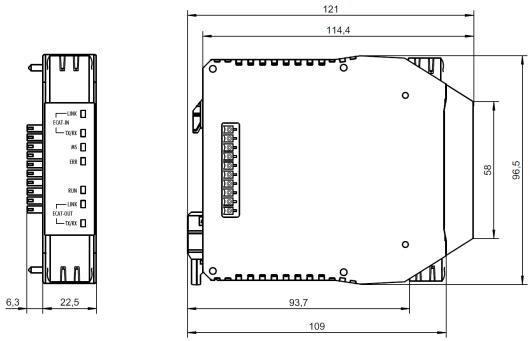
Dimensional drawing EtherCAT gateway (mm)
